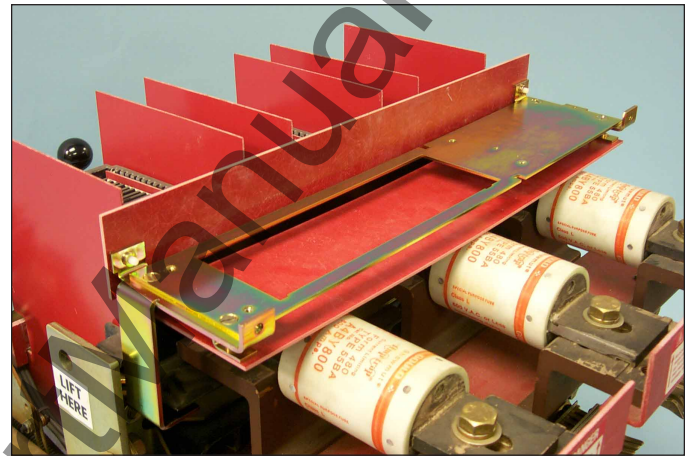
Aux. CT Module Mounting Platform Installed on the Aux. CT Module Mounting Brackets.
